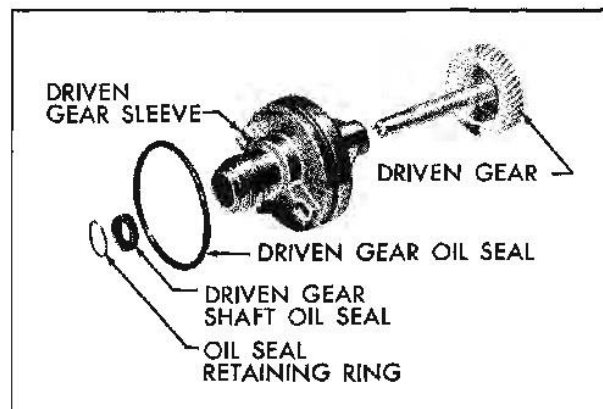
B-40 Speedometer Driven Gear and Sleeve Assembly - Exploded View
